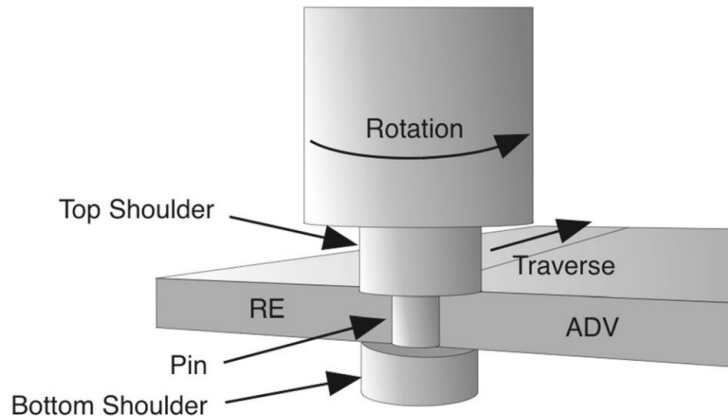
Self-reacting friction stir welding (SRFSW) bobbin-tool. Adapted from [44].
